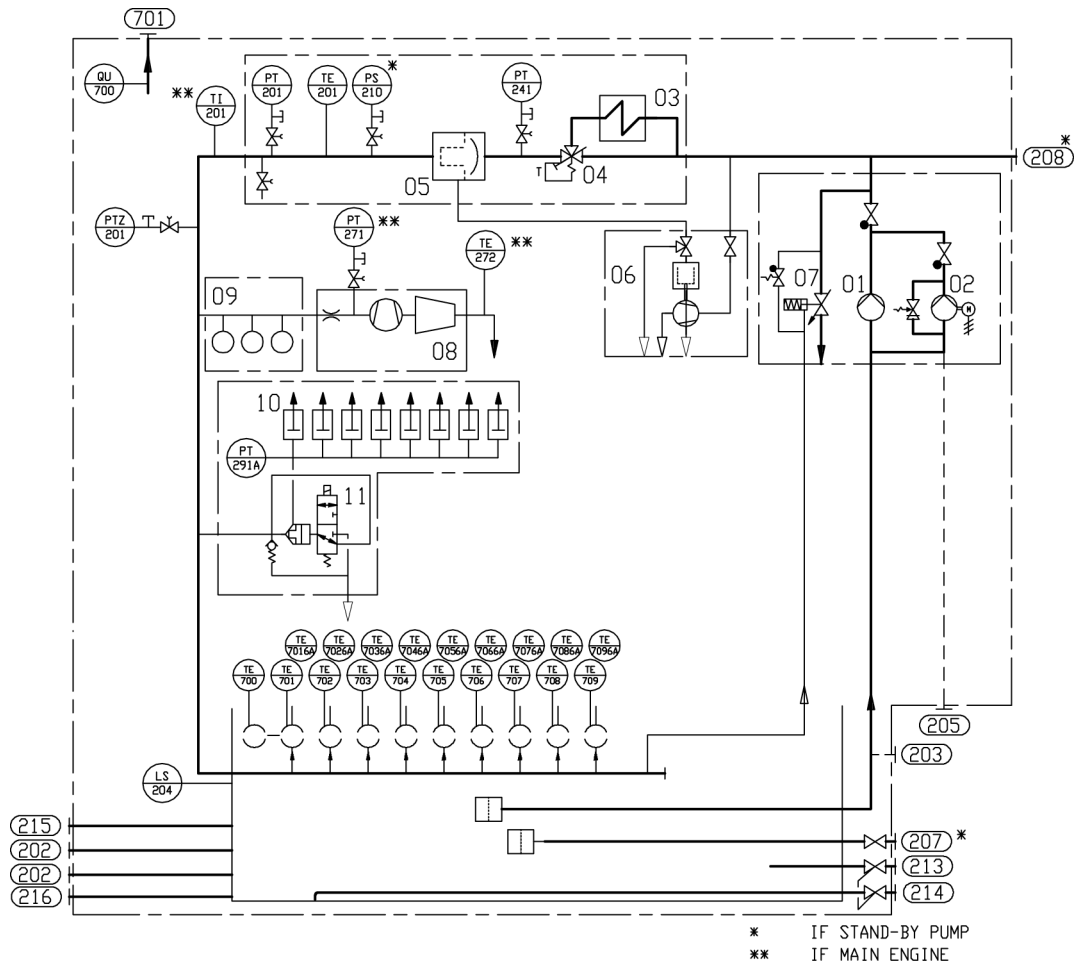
Internal lubricating oil system 580 kW/cyl, in-line engines (DAAF057025C)
